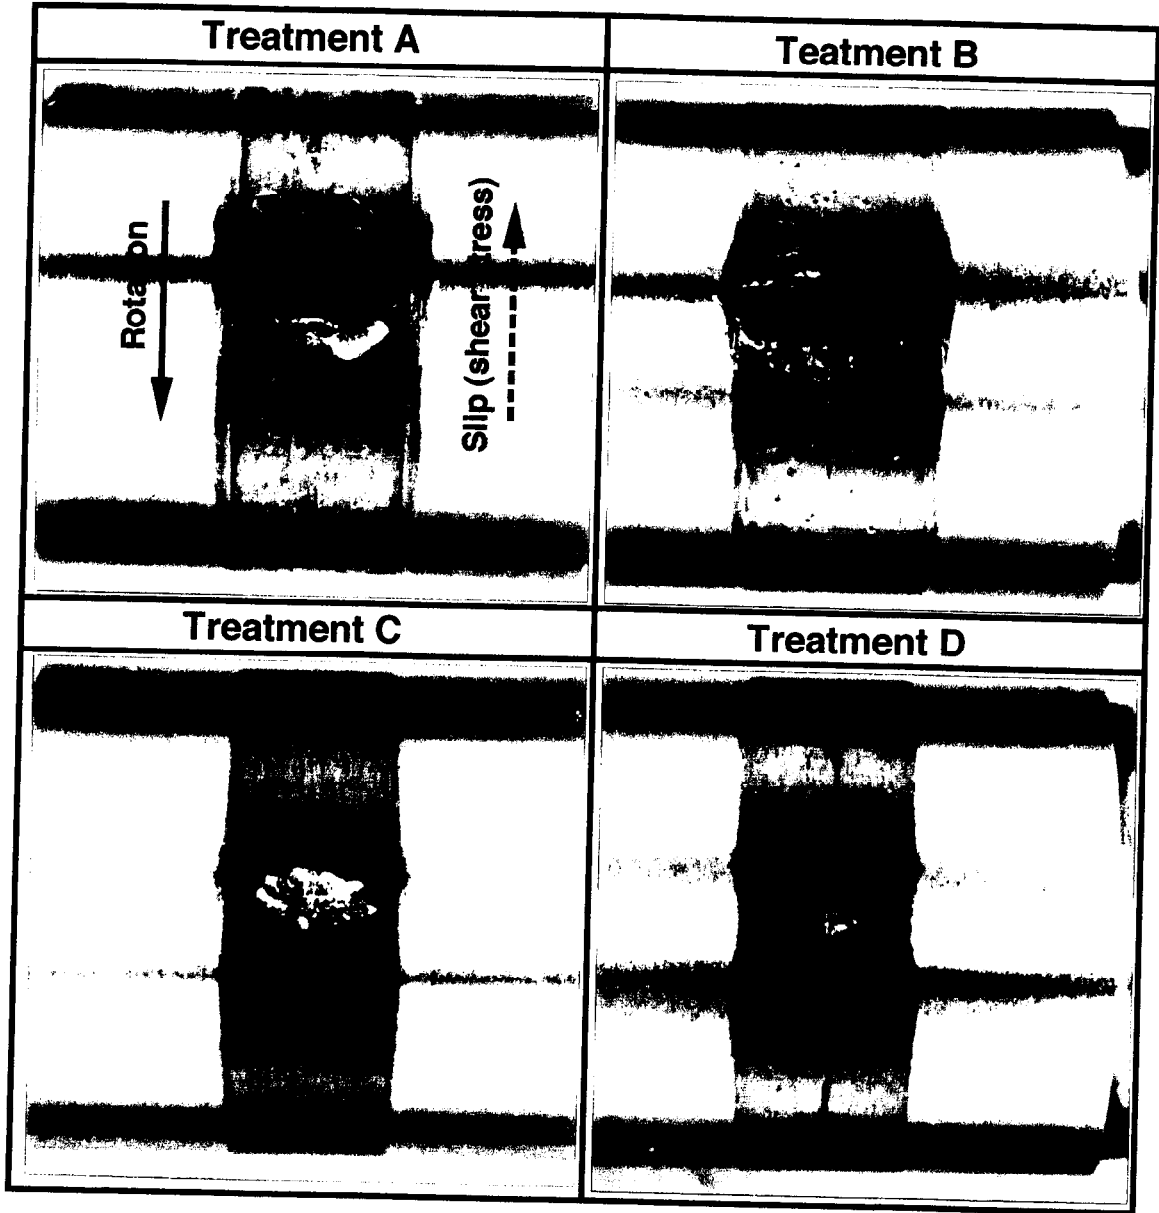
Examples of typical surface fractures of specimens after roller-pitting test.
